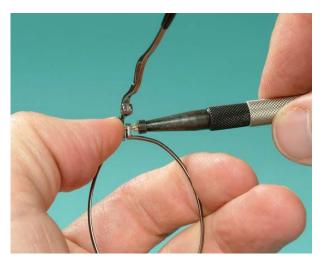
The Bull's-Eye Screw Drilling Guide is clamped to the screw. The drill is guided exactly onto the screw by going through a hole in the drilling guide.
